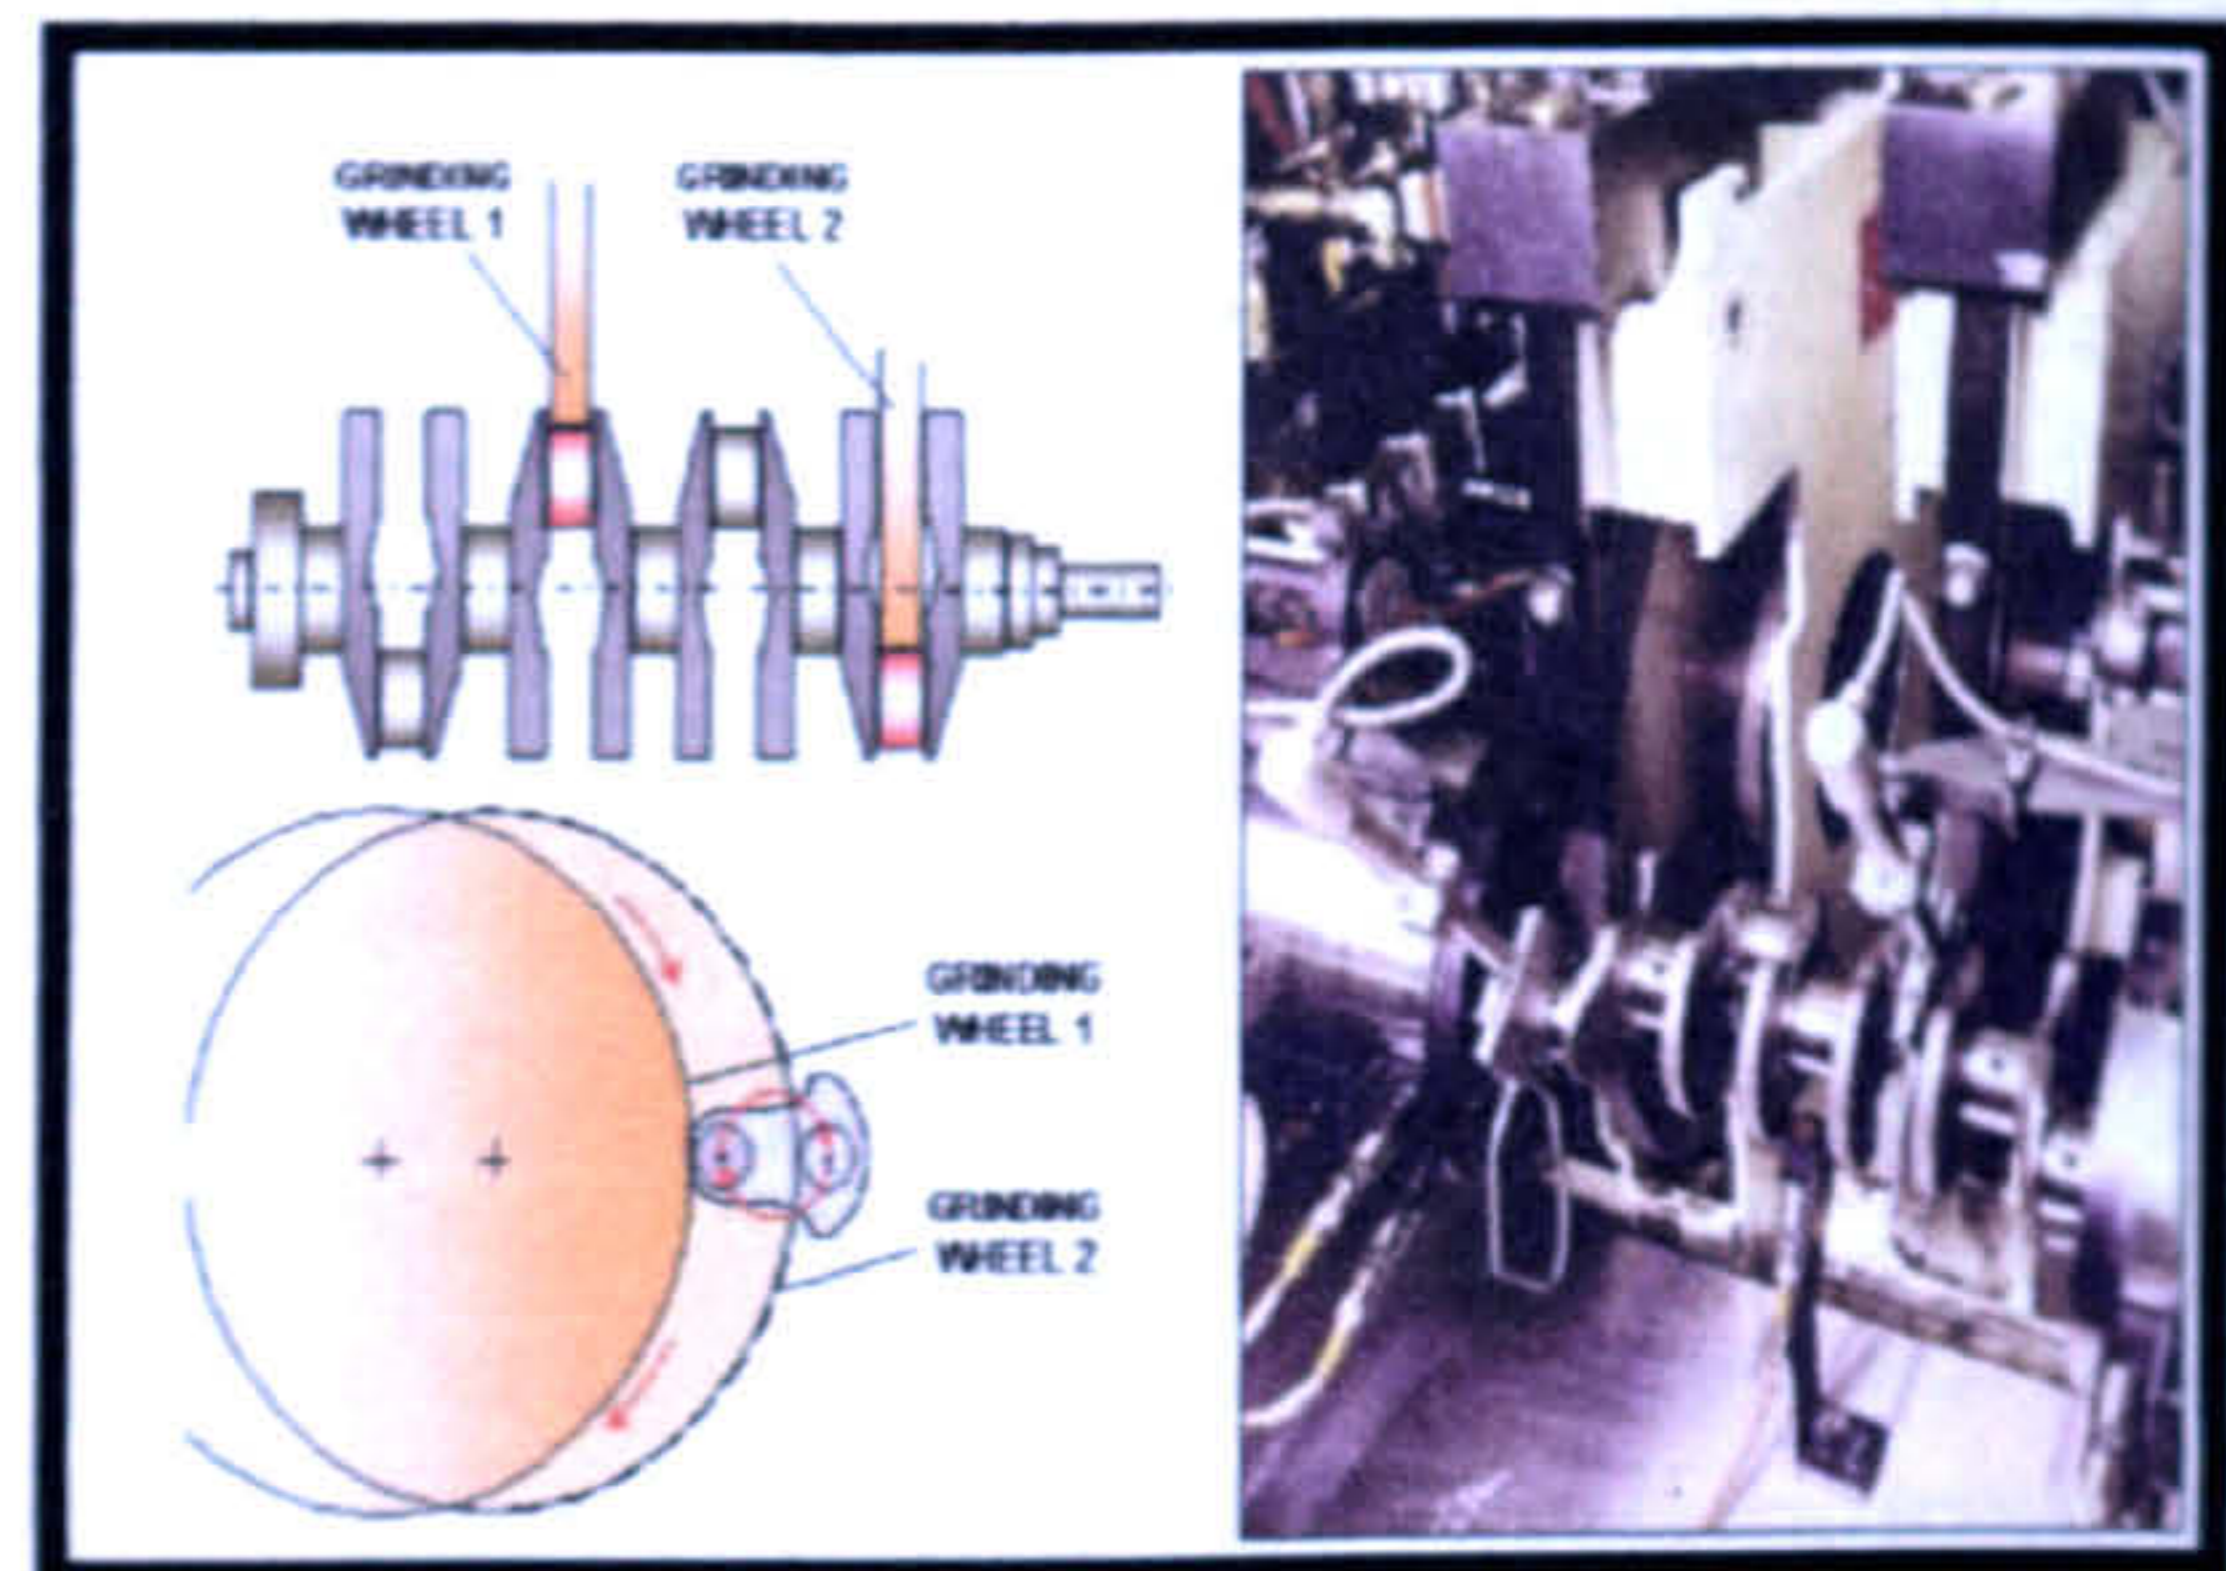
Grinding Configuration for Orbital Twin-Wheel Crank Machine
